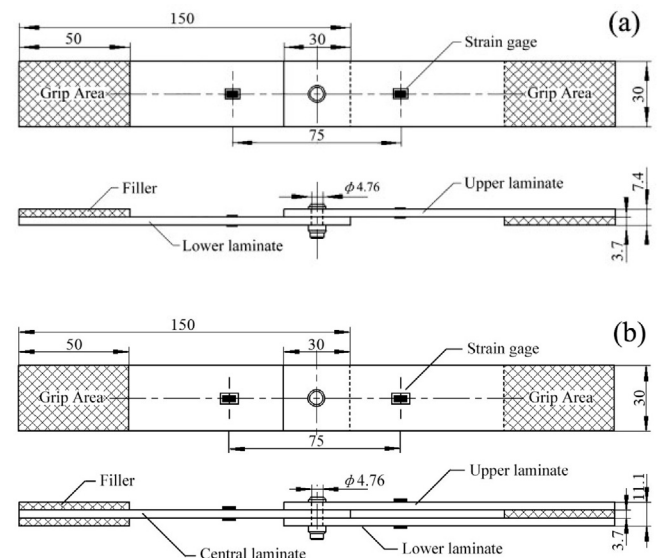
Configuration and dimensions of specimens (Unit: mm) (a) specimen of single-lap joint, (b) specimen of double-lap joint.
